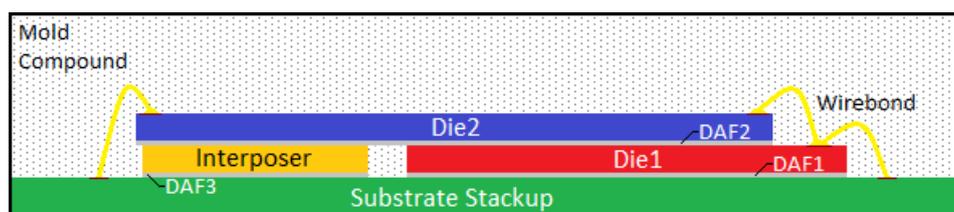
Package cross-section with added interposer to support Die2 (top die) overhang
